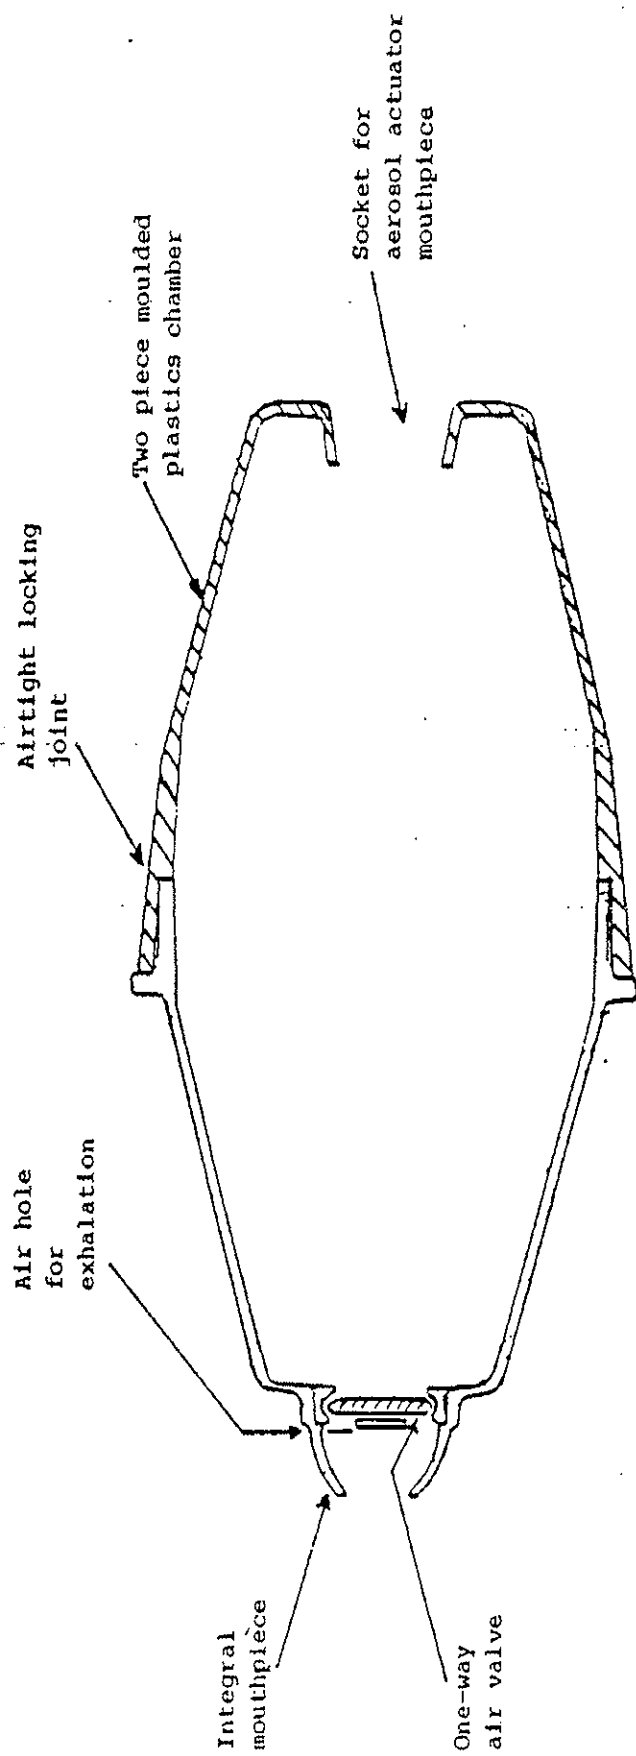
Centre-line sectional longitudinal view of the 750ml spacer.
